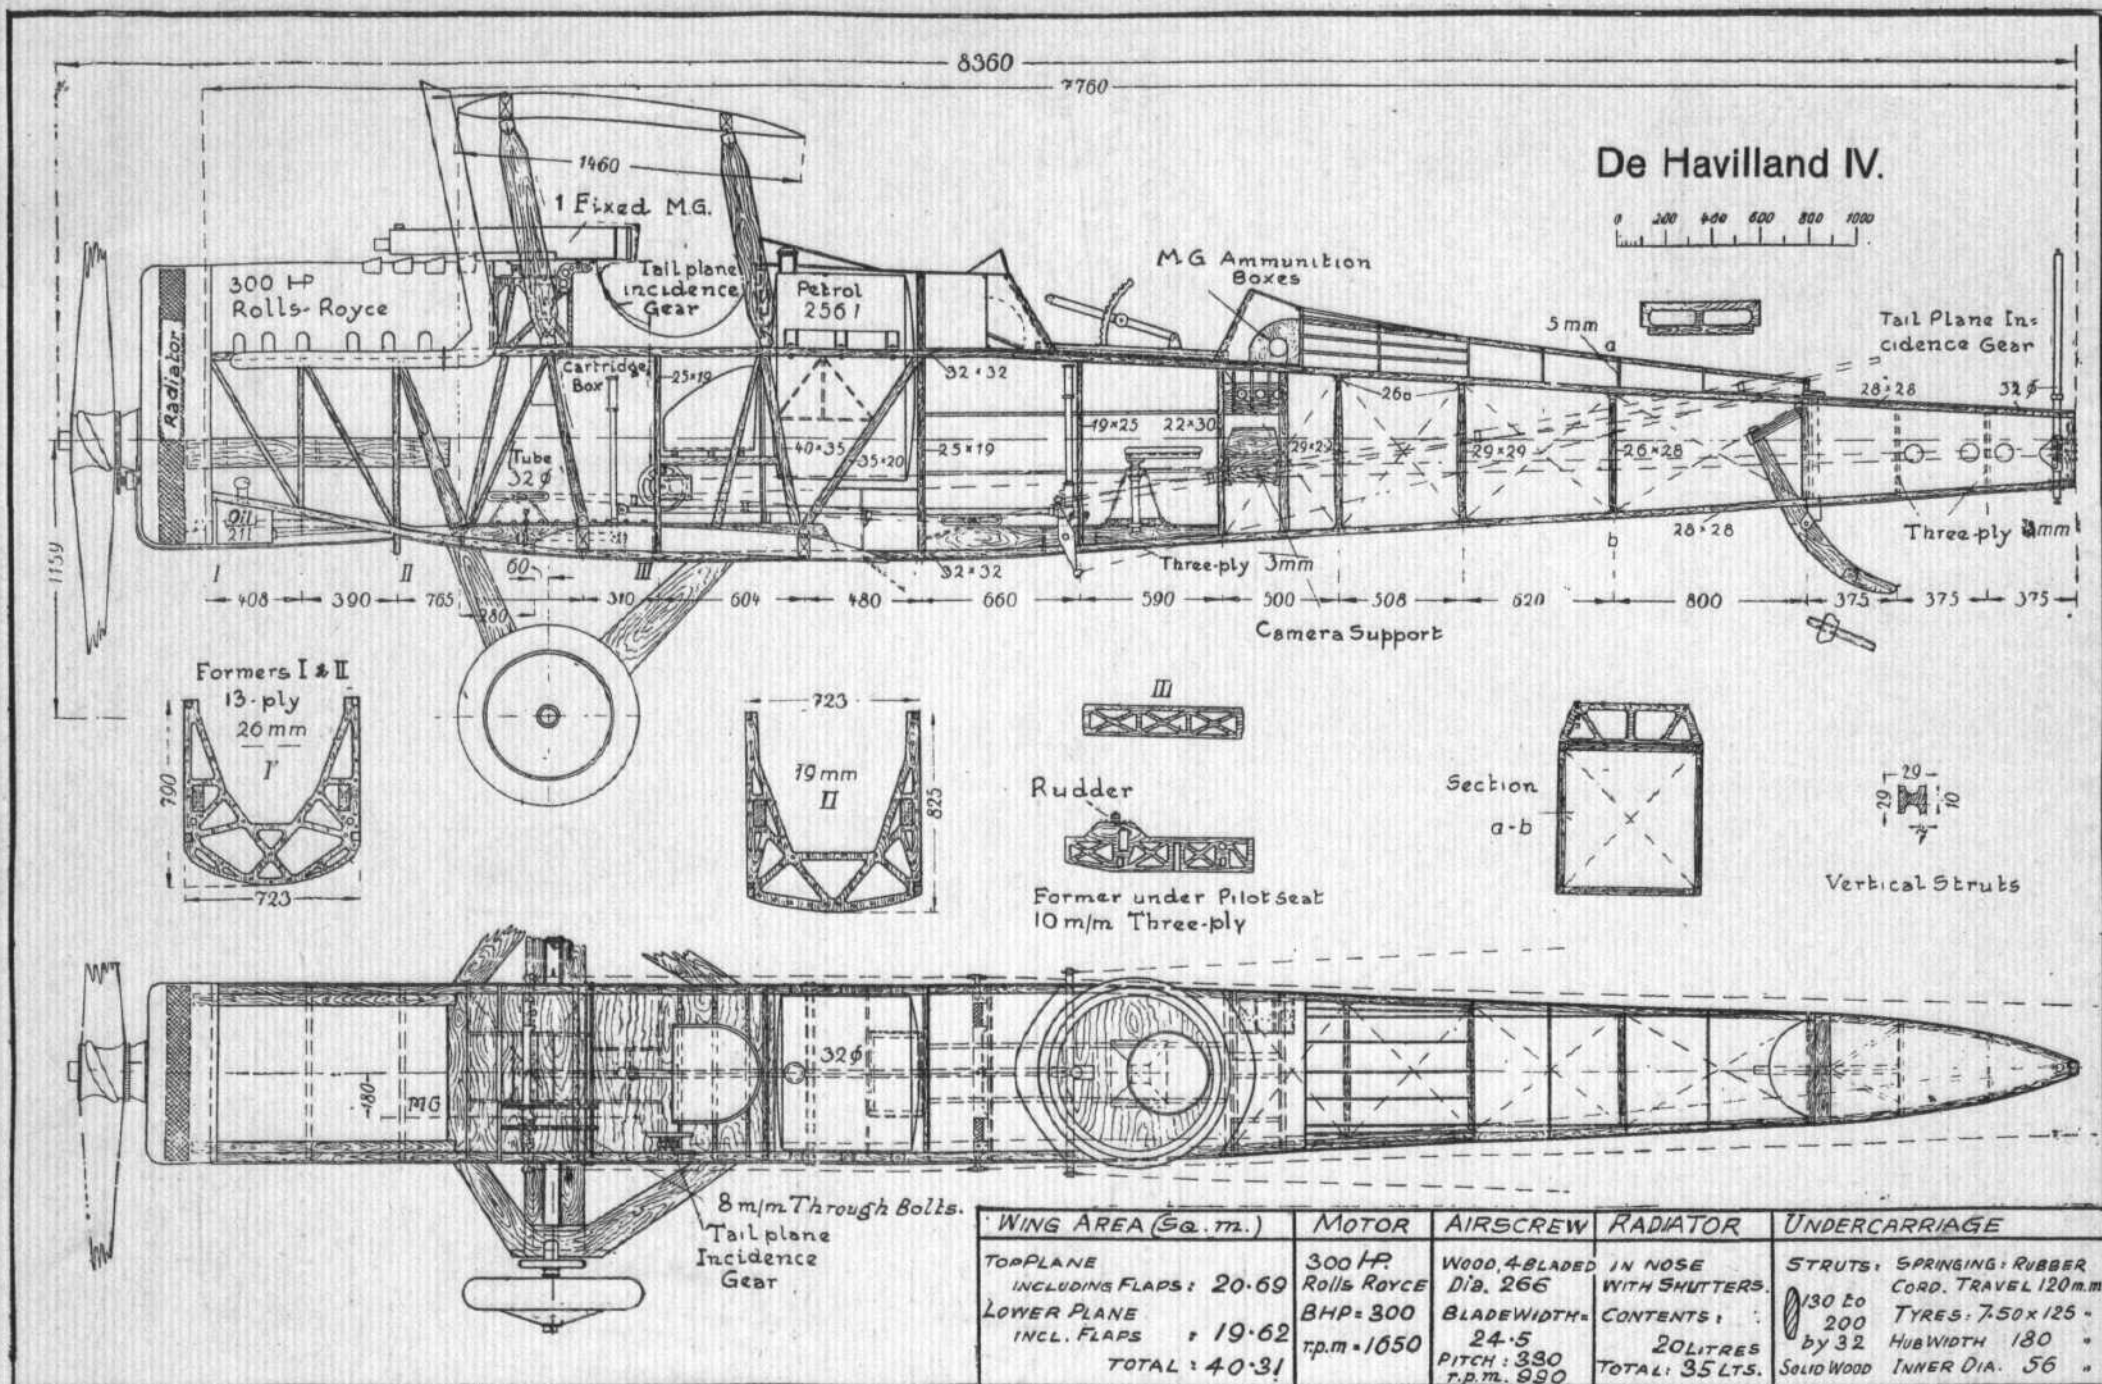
Scale drawing of the body of the de Havilland IV biplane.
